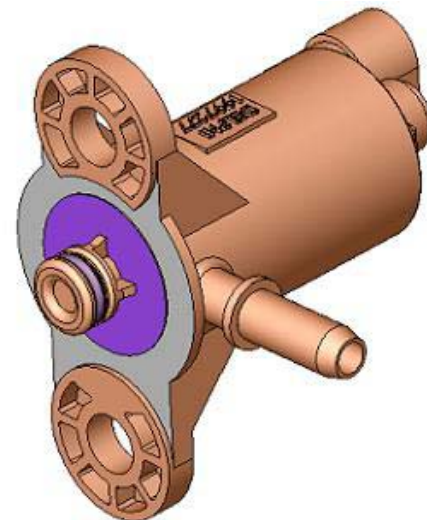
Pressure Trim Valve and Fuel Trim Valve
